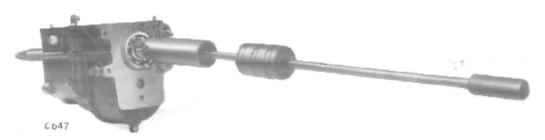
Using Churchill main tool 4235A with adaptor S.4235A-2 to remove input shaft assembly
